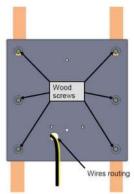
Fix optional plate with 6 lag screws using 17mm box spanner
